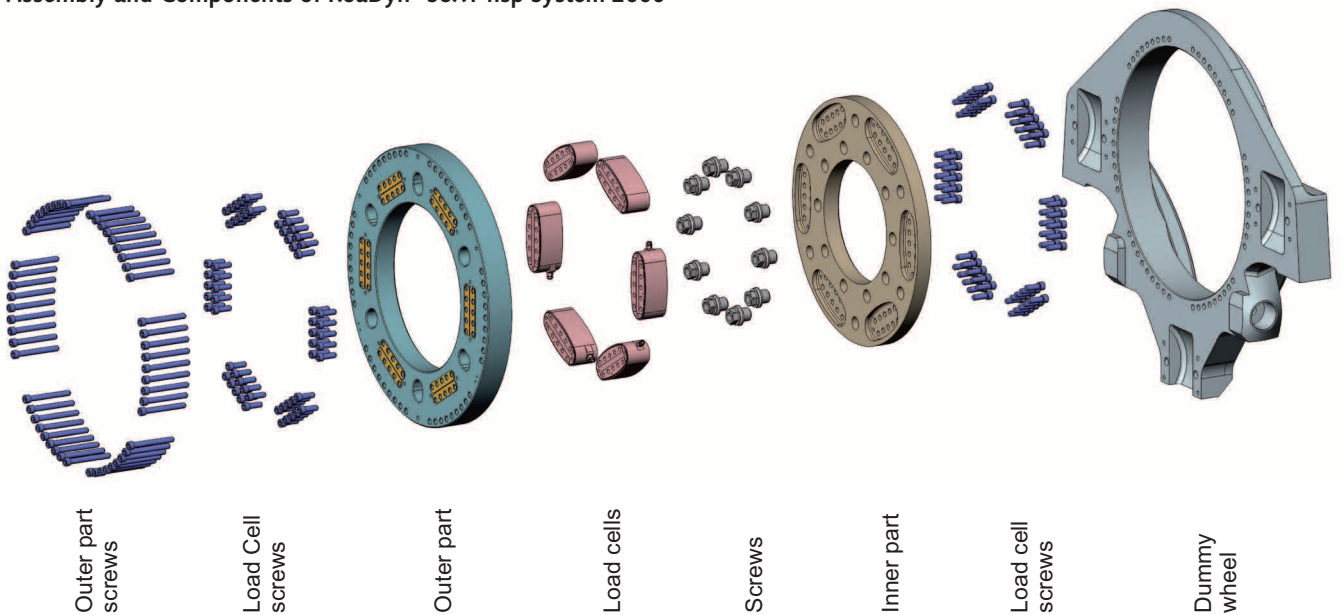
Assembly and components of RoaDyn® S6XT nsp
